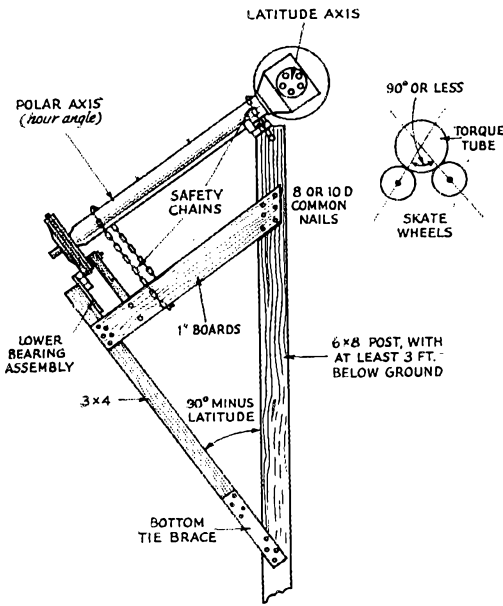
Drive mechanism for the big array, before the wooden structure is mounted in place. Principle components are Buick rear end and torque-tube drive. Both ends of the torque tube turn on bearings made of roller-skate wheels. Position of the torque tube and skate wheels in the upper bearing is shown at the upper right.
